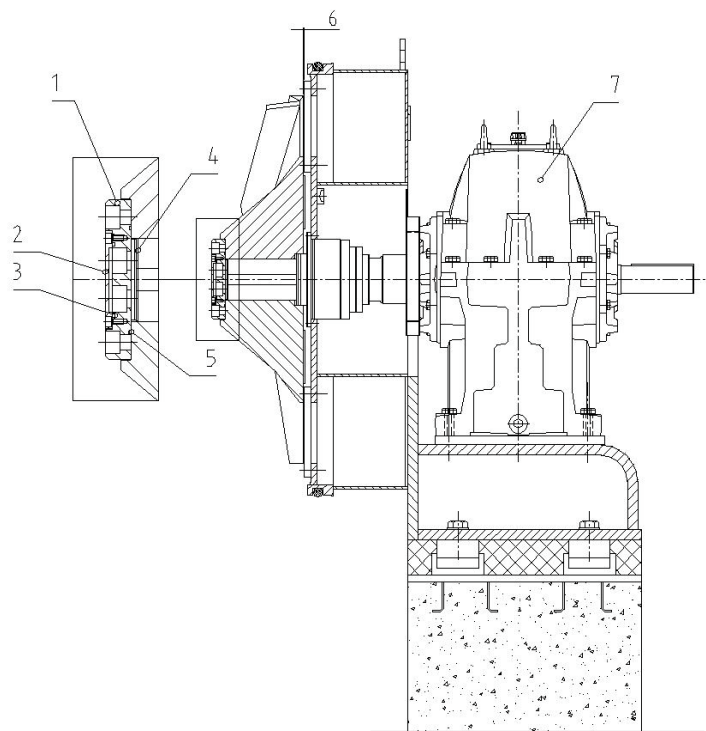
Adjusting the rotor clearance, gear drive (STOA016595)
